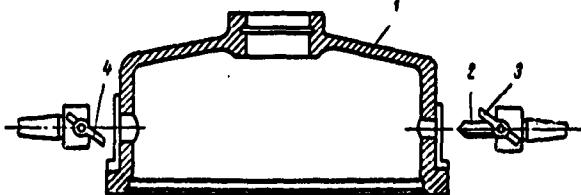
Diagram illustrating boring of axis-pin holes on ganged machine with two heads. 1) Gyromotor housing; 2) flat drill; 3) spotfacing tool; 4) boring tool.
